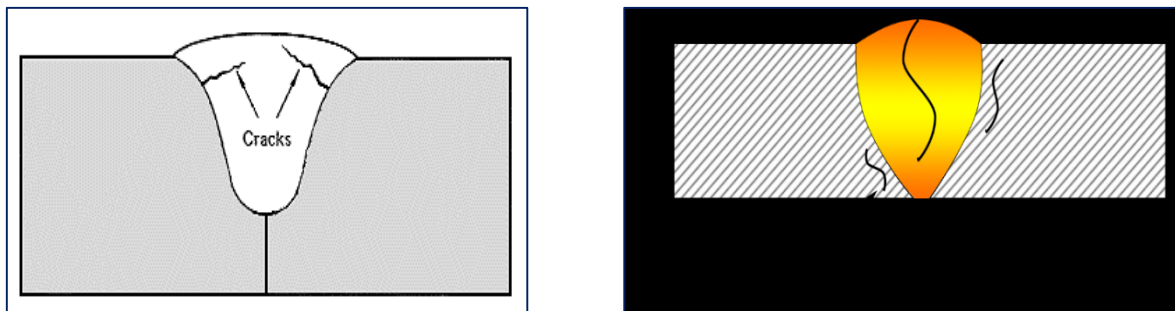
Cracks in Welded Joints [76]
